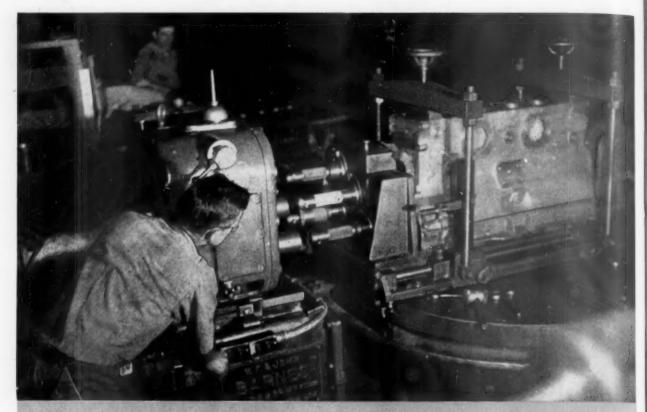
Finish hering line bearings for crankshaft, camshaft and auxiliary shaft and compressor on diesel block.
